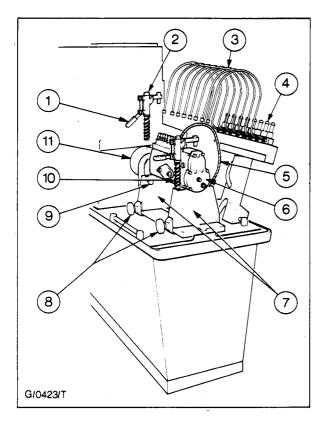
Injection Pump Mounted on Stand - 8 Cylinder Pump Illustrated
